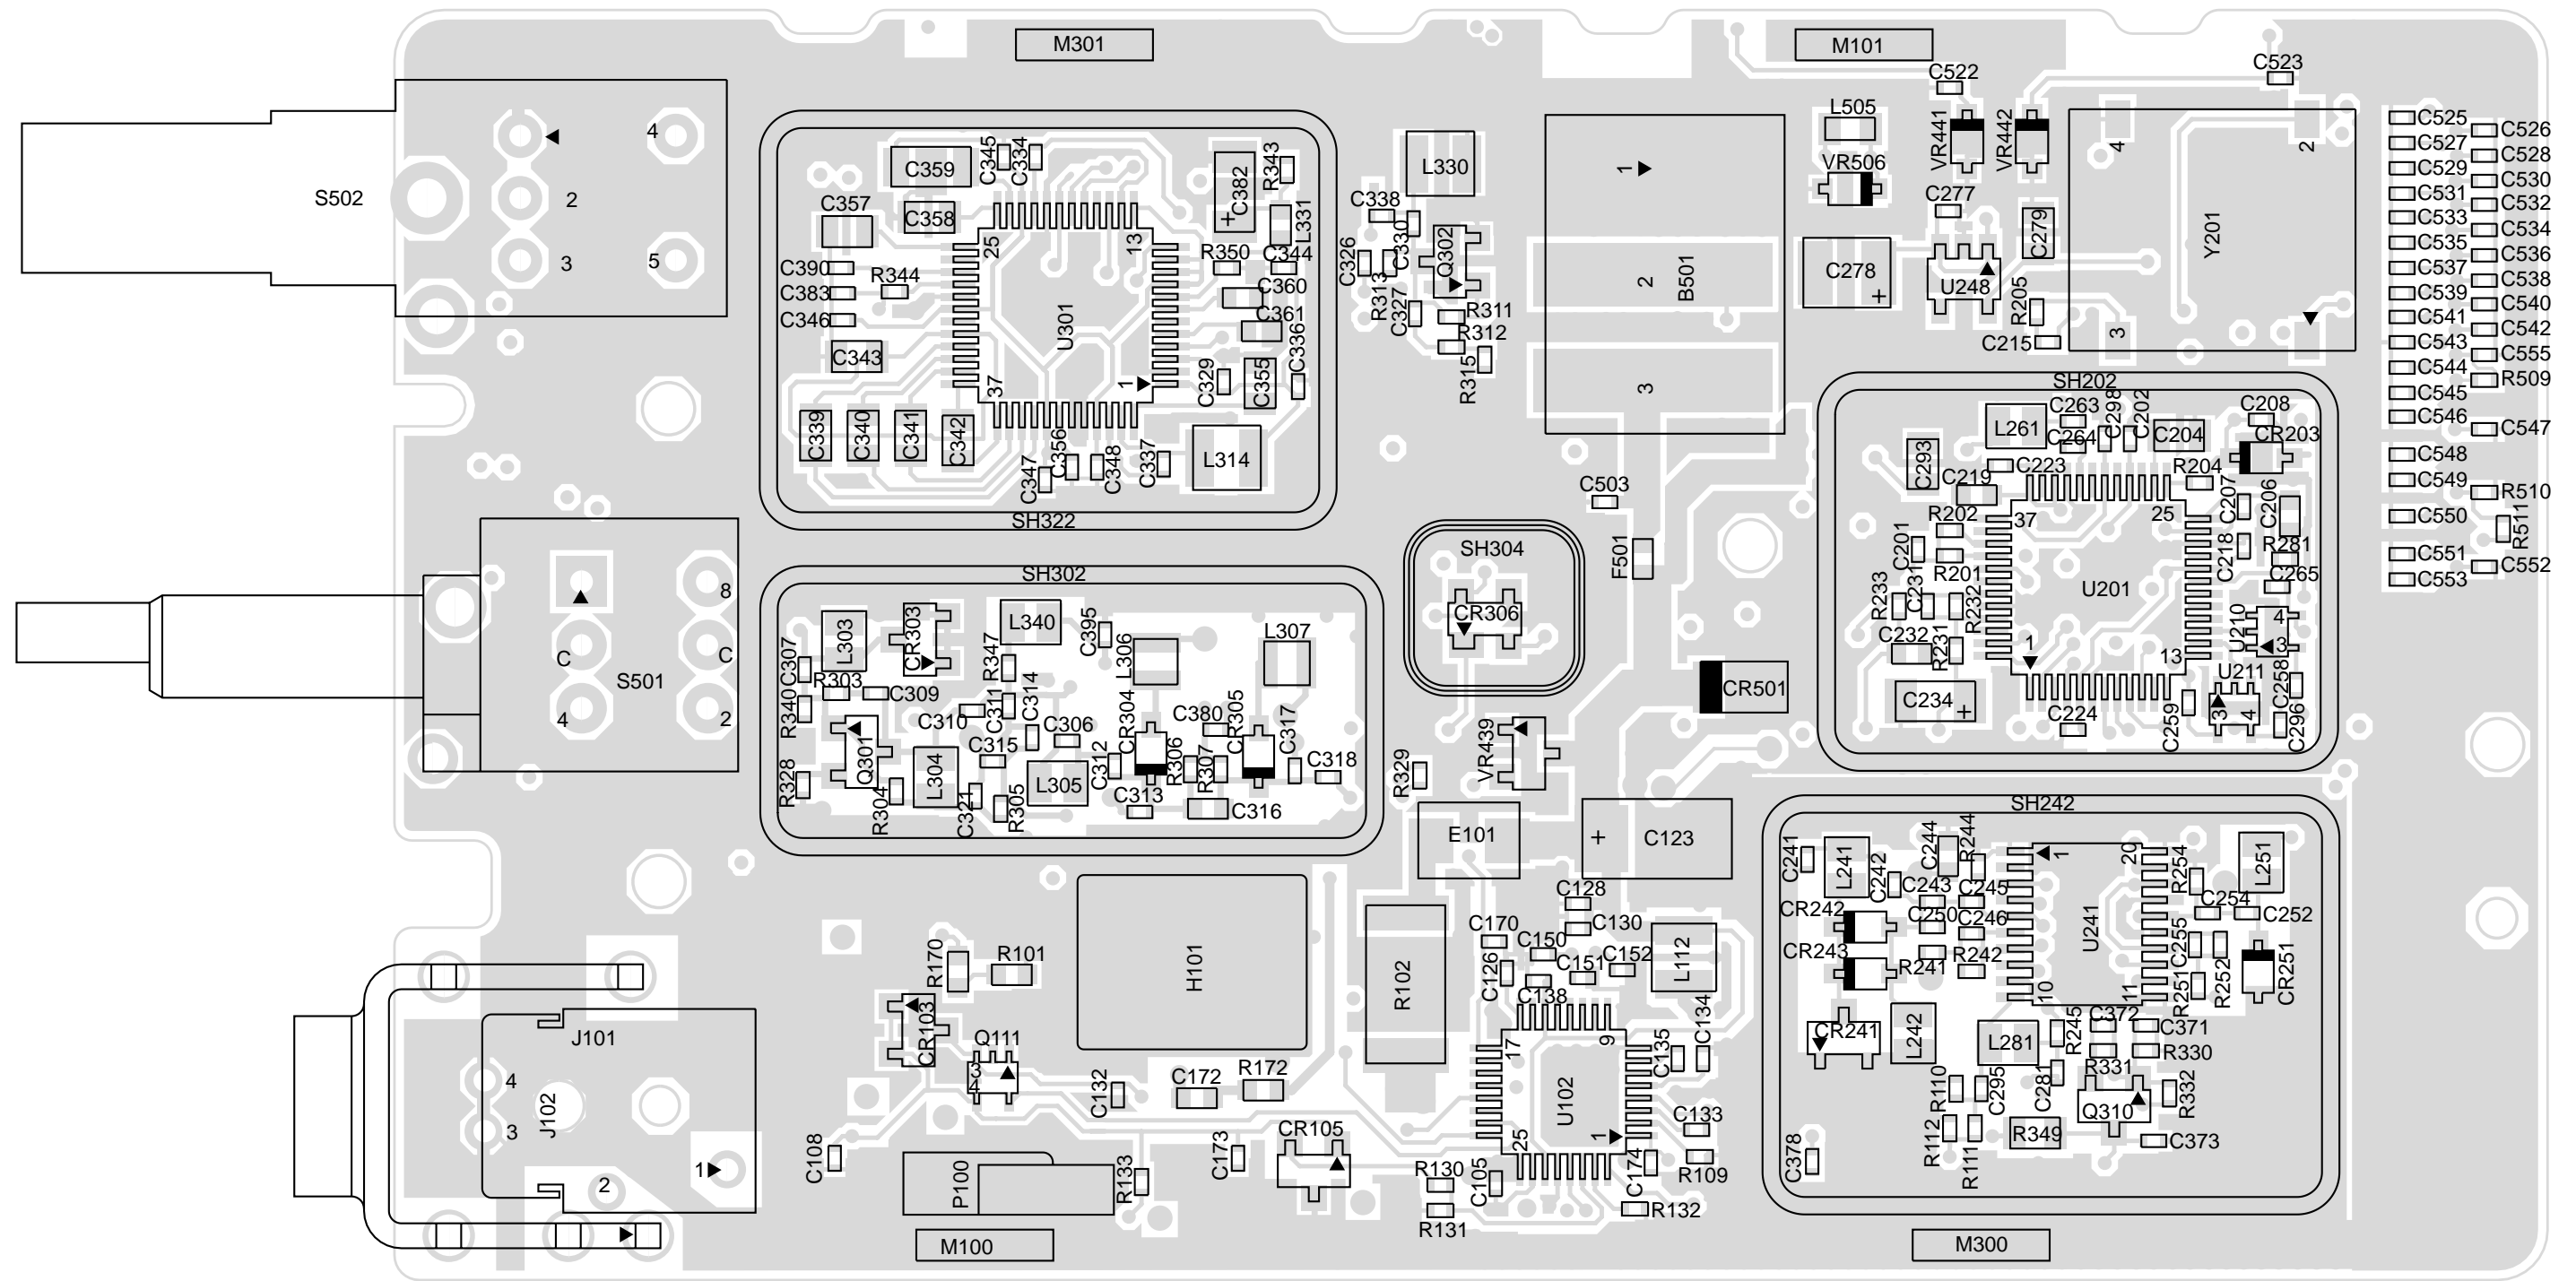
UHF Band 2 (450-527MHz) Main Board Bottom Side PCB No. 8485641Z02
